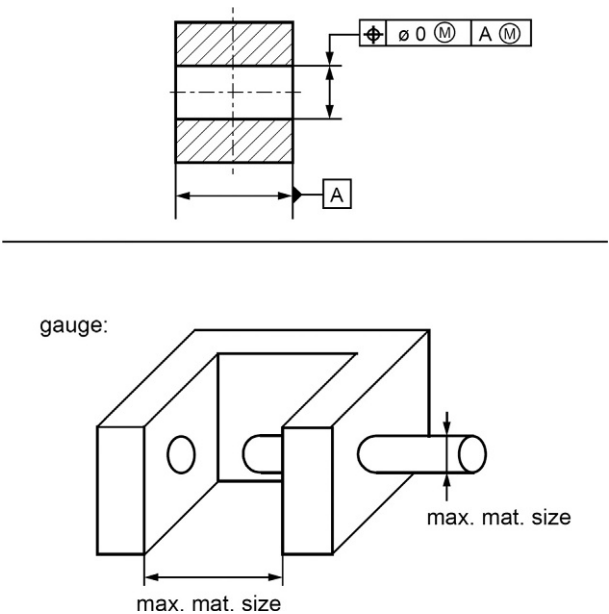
Tolerancing of a ring or bush for a clearance fit
